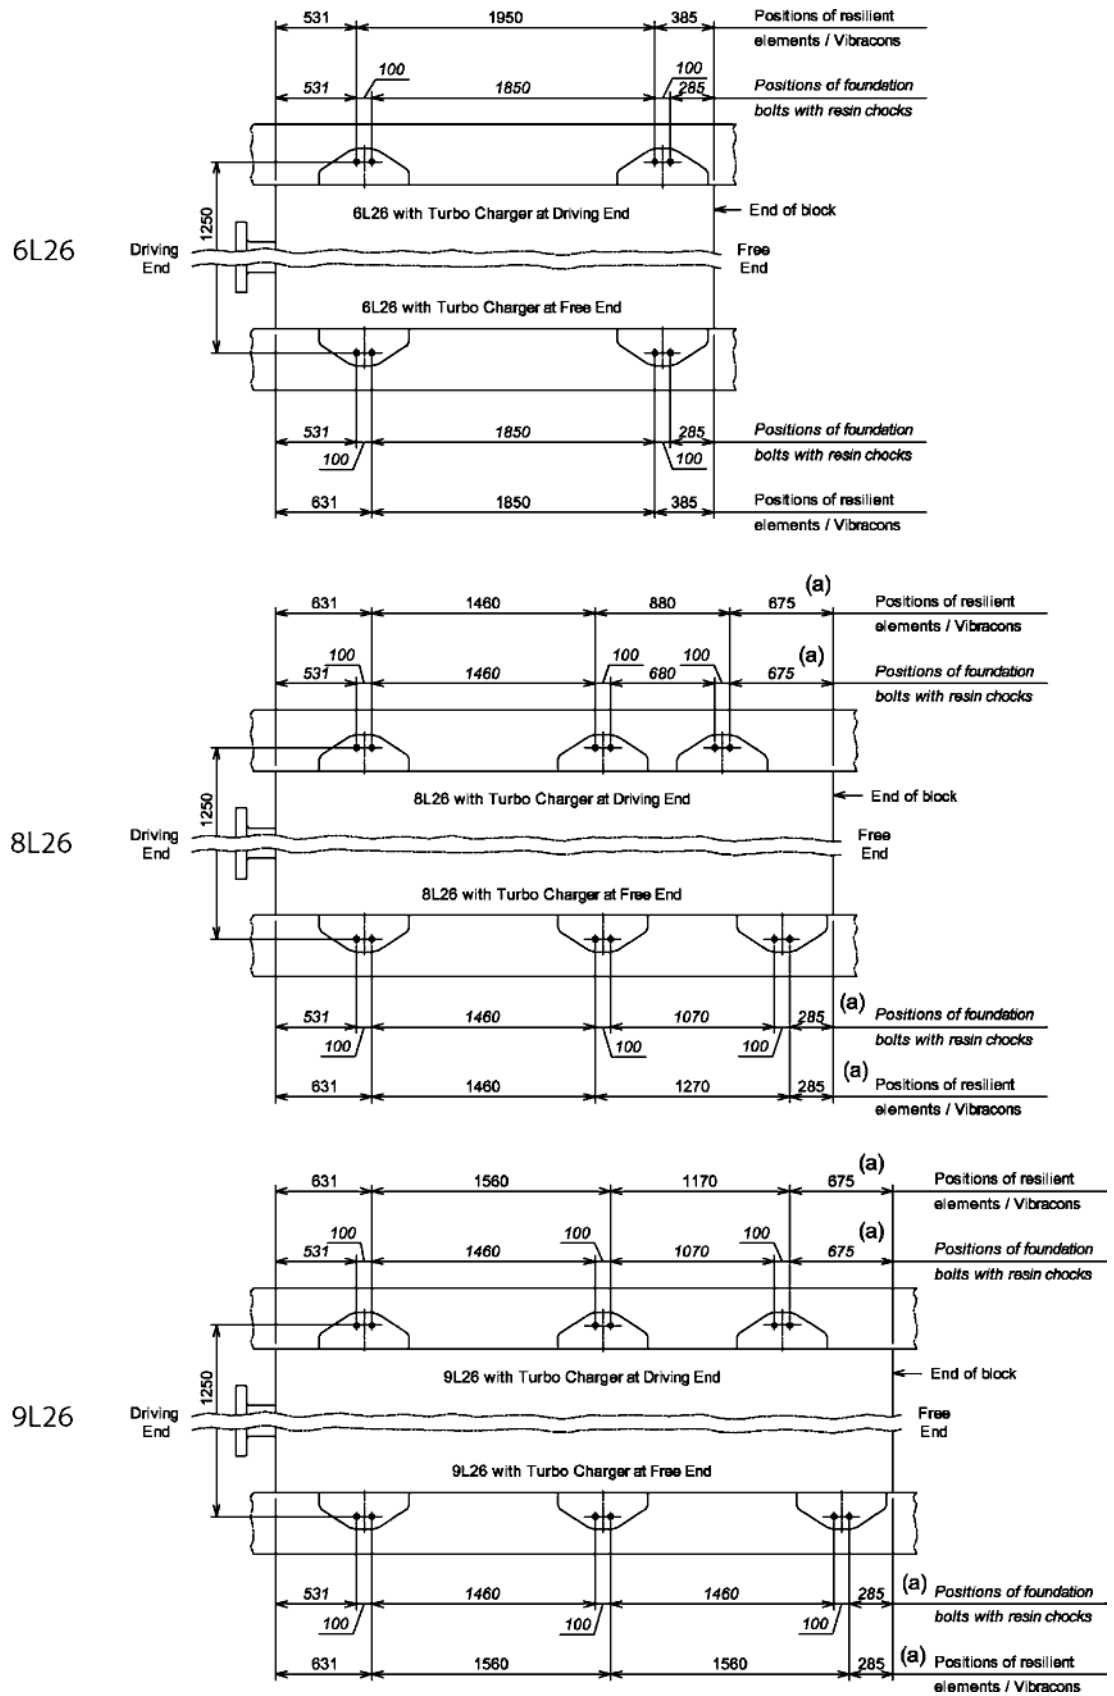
Foundation top-view and drilling plan, in-line engines (9813ZT110A)
